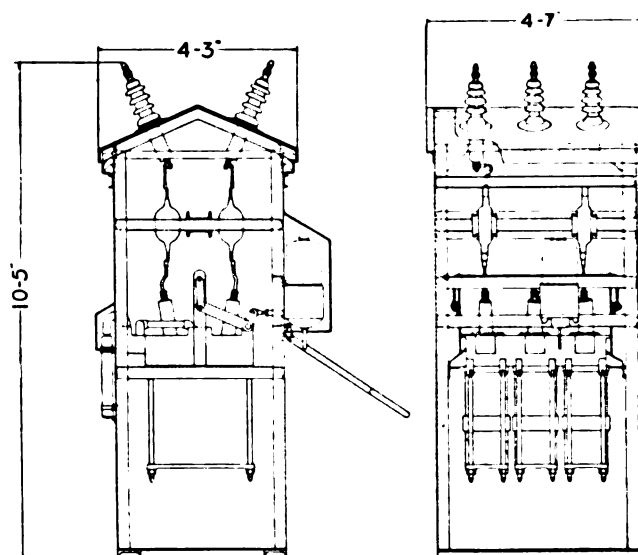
Cubicle floor-mounting type of outdoor switchgear.
